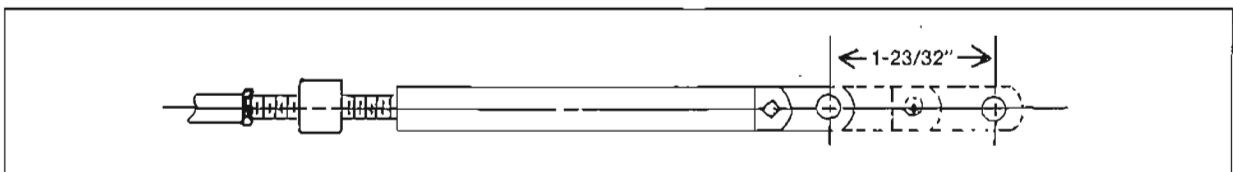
MINIMUM Drive Unit Shift Cable Travel (1-23/32 inches)
